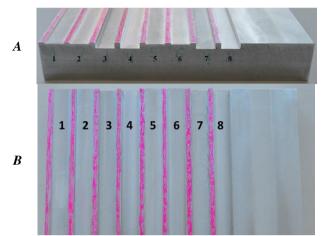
The machined surfaces of the billet: A – the side view; B – the top view.
